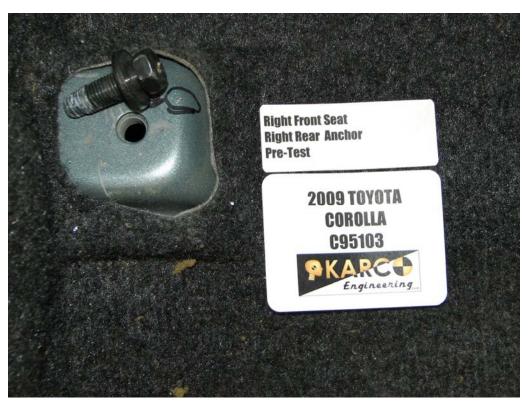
Floor Pan Anchor, P2, Pre-Test
